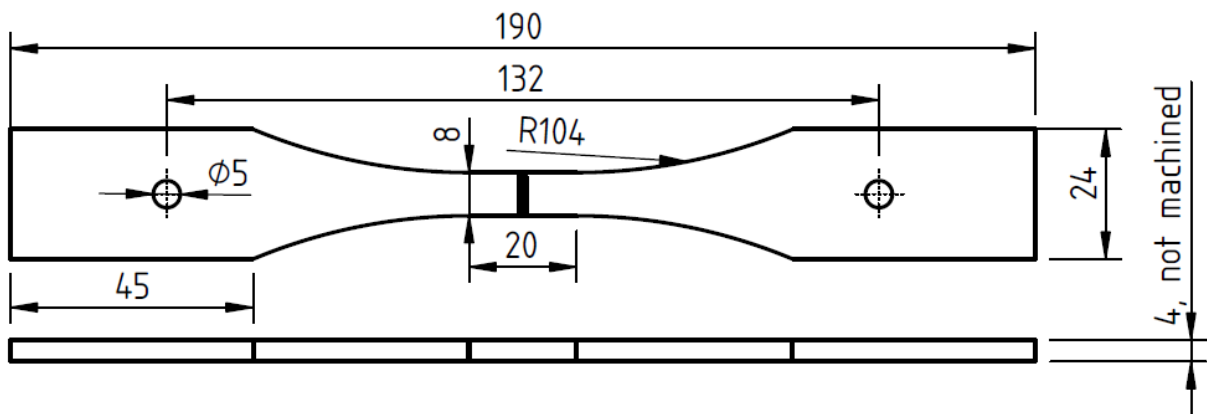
Specimen geometry for fatigue and preliminary tensile tests.
